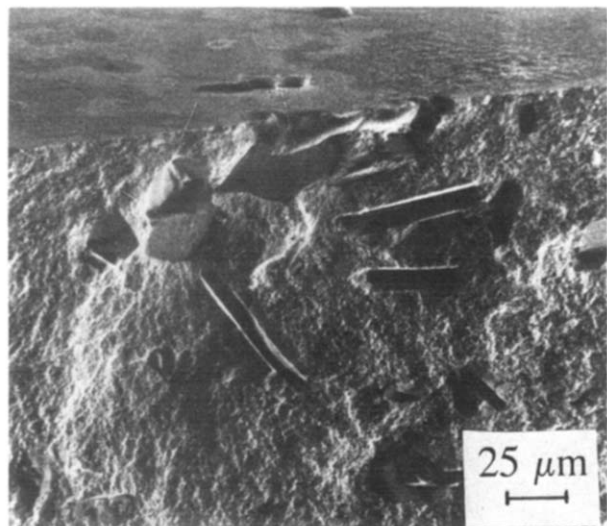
SEM picture of a M platelet composite rupture faces, showing coarse platelets at the fracture origin.
